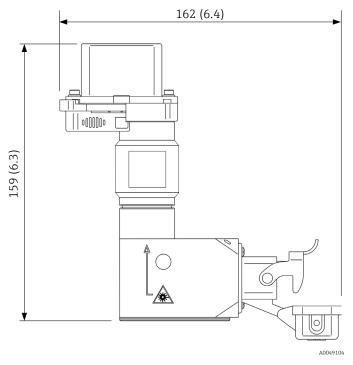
Rxn-46 probe side view. Dimensions: mm (in)
